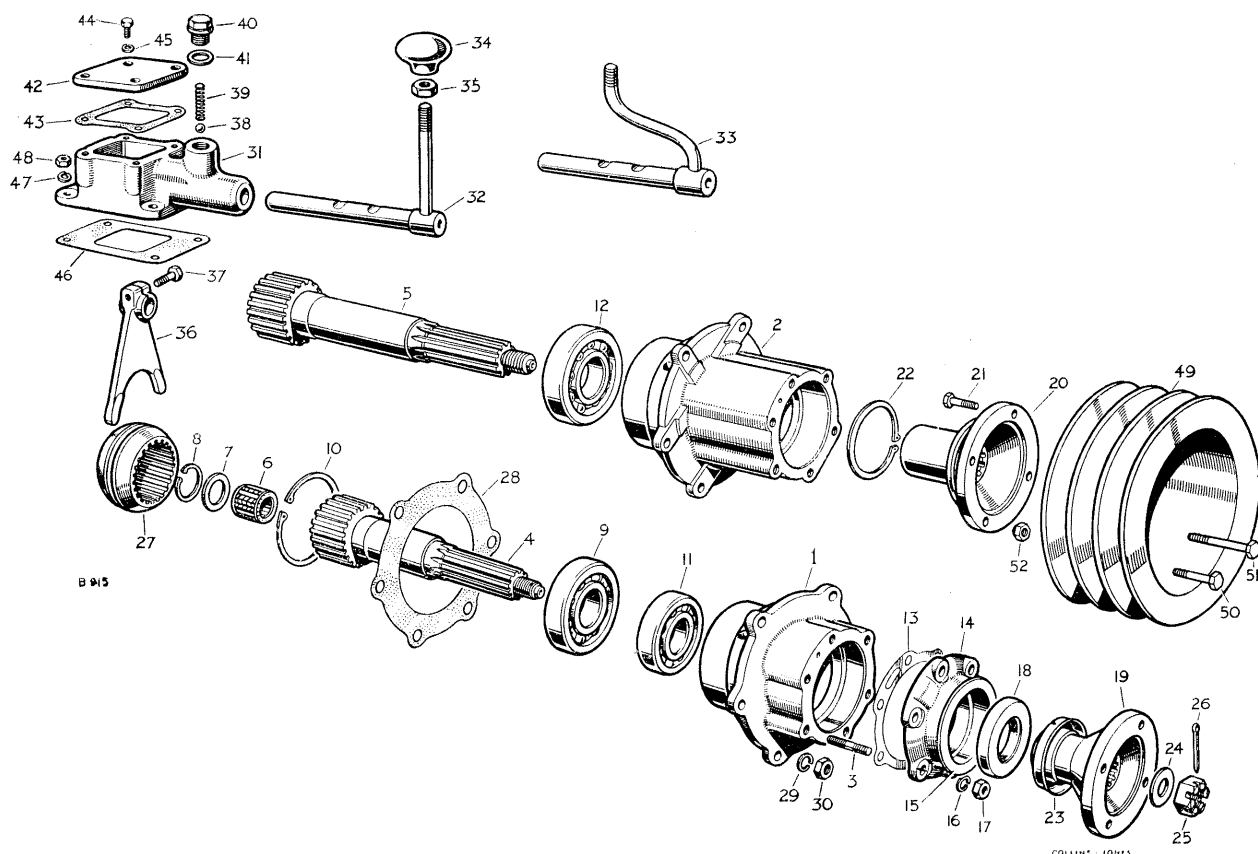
Layout of gearbox drive unit and centre pulley (early type illustrated)
